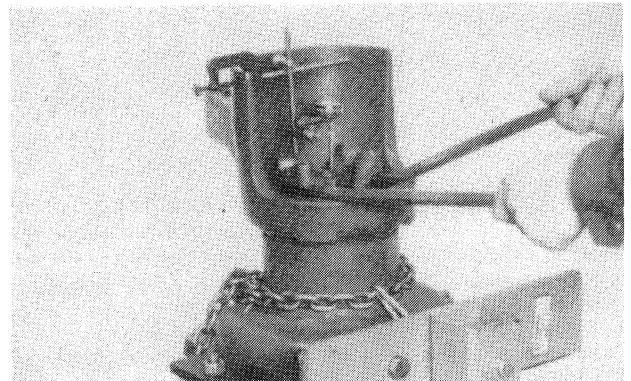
Position dial indicator against end of pinion shaft, then use two pry bars to push pinion shaft up to measure end play. Recommended end play is 0.001-0.003 inch (0.025-0.080 mm). Refer to text.
